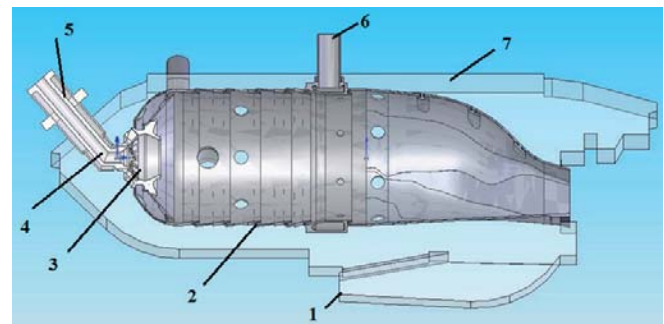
The scheme of the investigated combustion chamber: 1 – air after compressor; 2 – flame tube; 3 – swirler; 4 – nozzle; 5 – ecological steam injection; 6 – power steam injection; 7 – casing.
